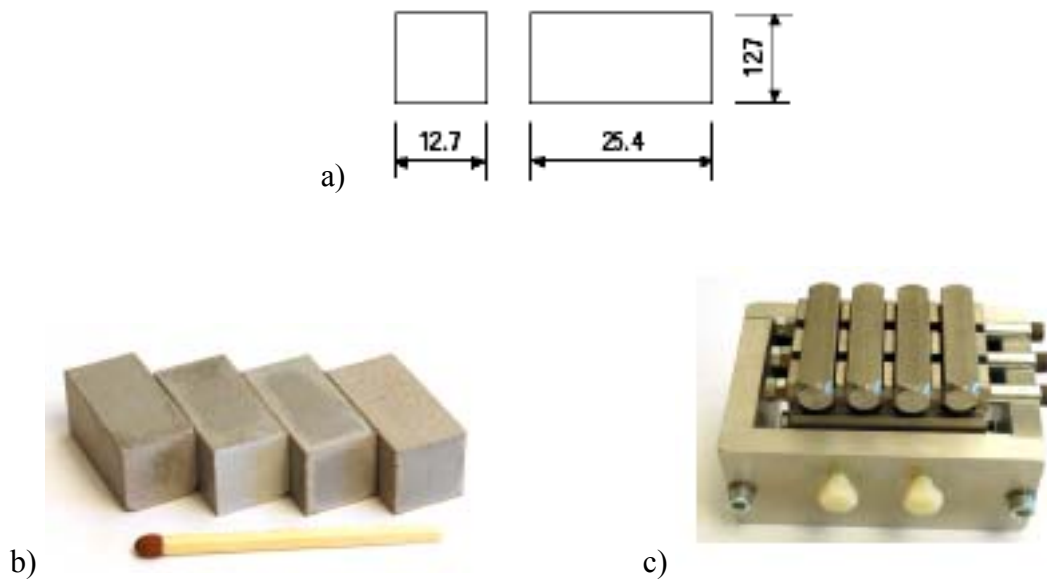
a) Compression test specimen's dimensions, b) Test specimens c) Moulding of test specimens^[20].
